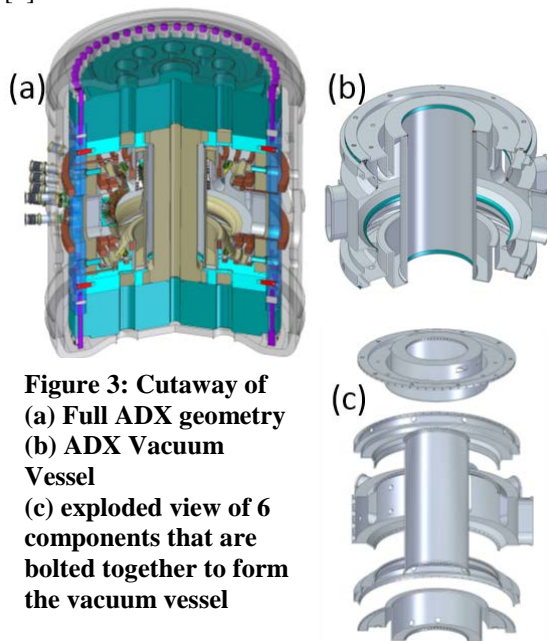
Cutaway of (a) Full ADX geometry (b) ADX Vacuum Vessel (c) exploded view of 6 components that are bolted together to form the vacuum vessel
